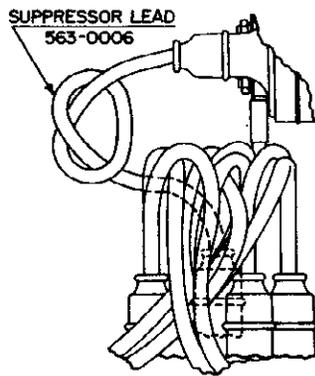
DISTRIBUTOR SUPPRESSOR 563-0004
